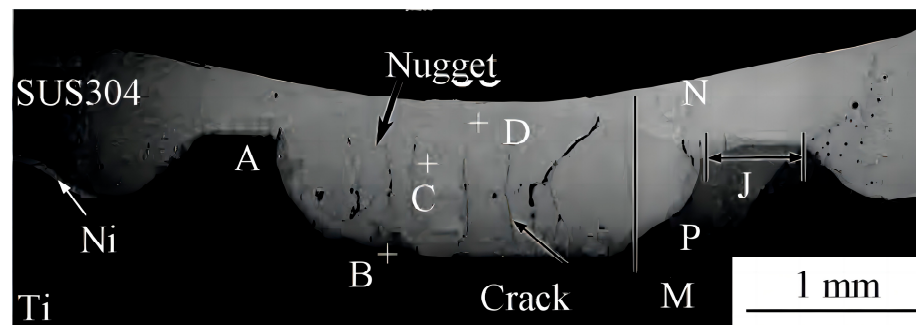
Morphology of Ti/Ni/SUS304 spot welding joint—Reprinted from Ref. [56]. 2018 Transactions of Materials and Heat Treatment.
